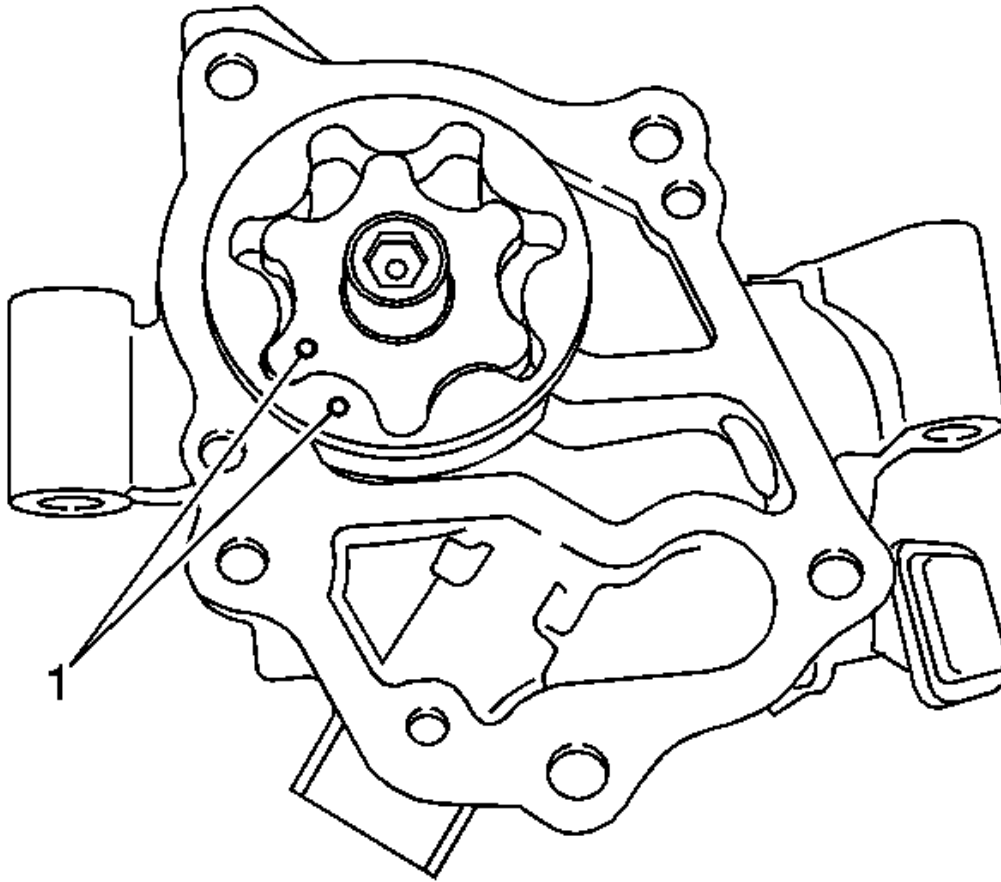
Identifying Oil Pump Drive & Driven Rotors
